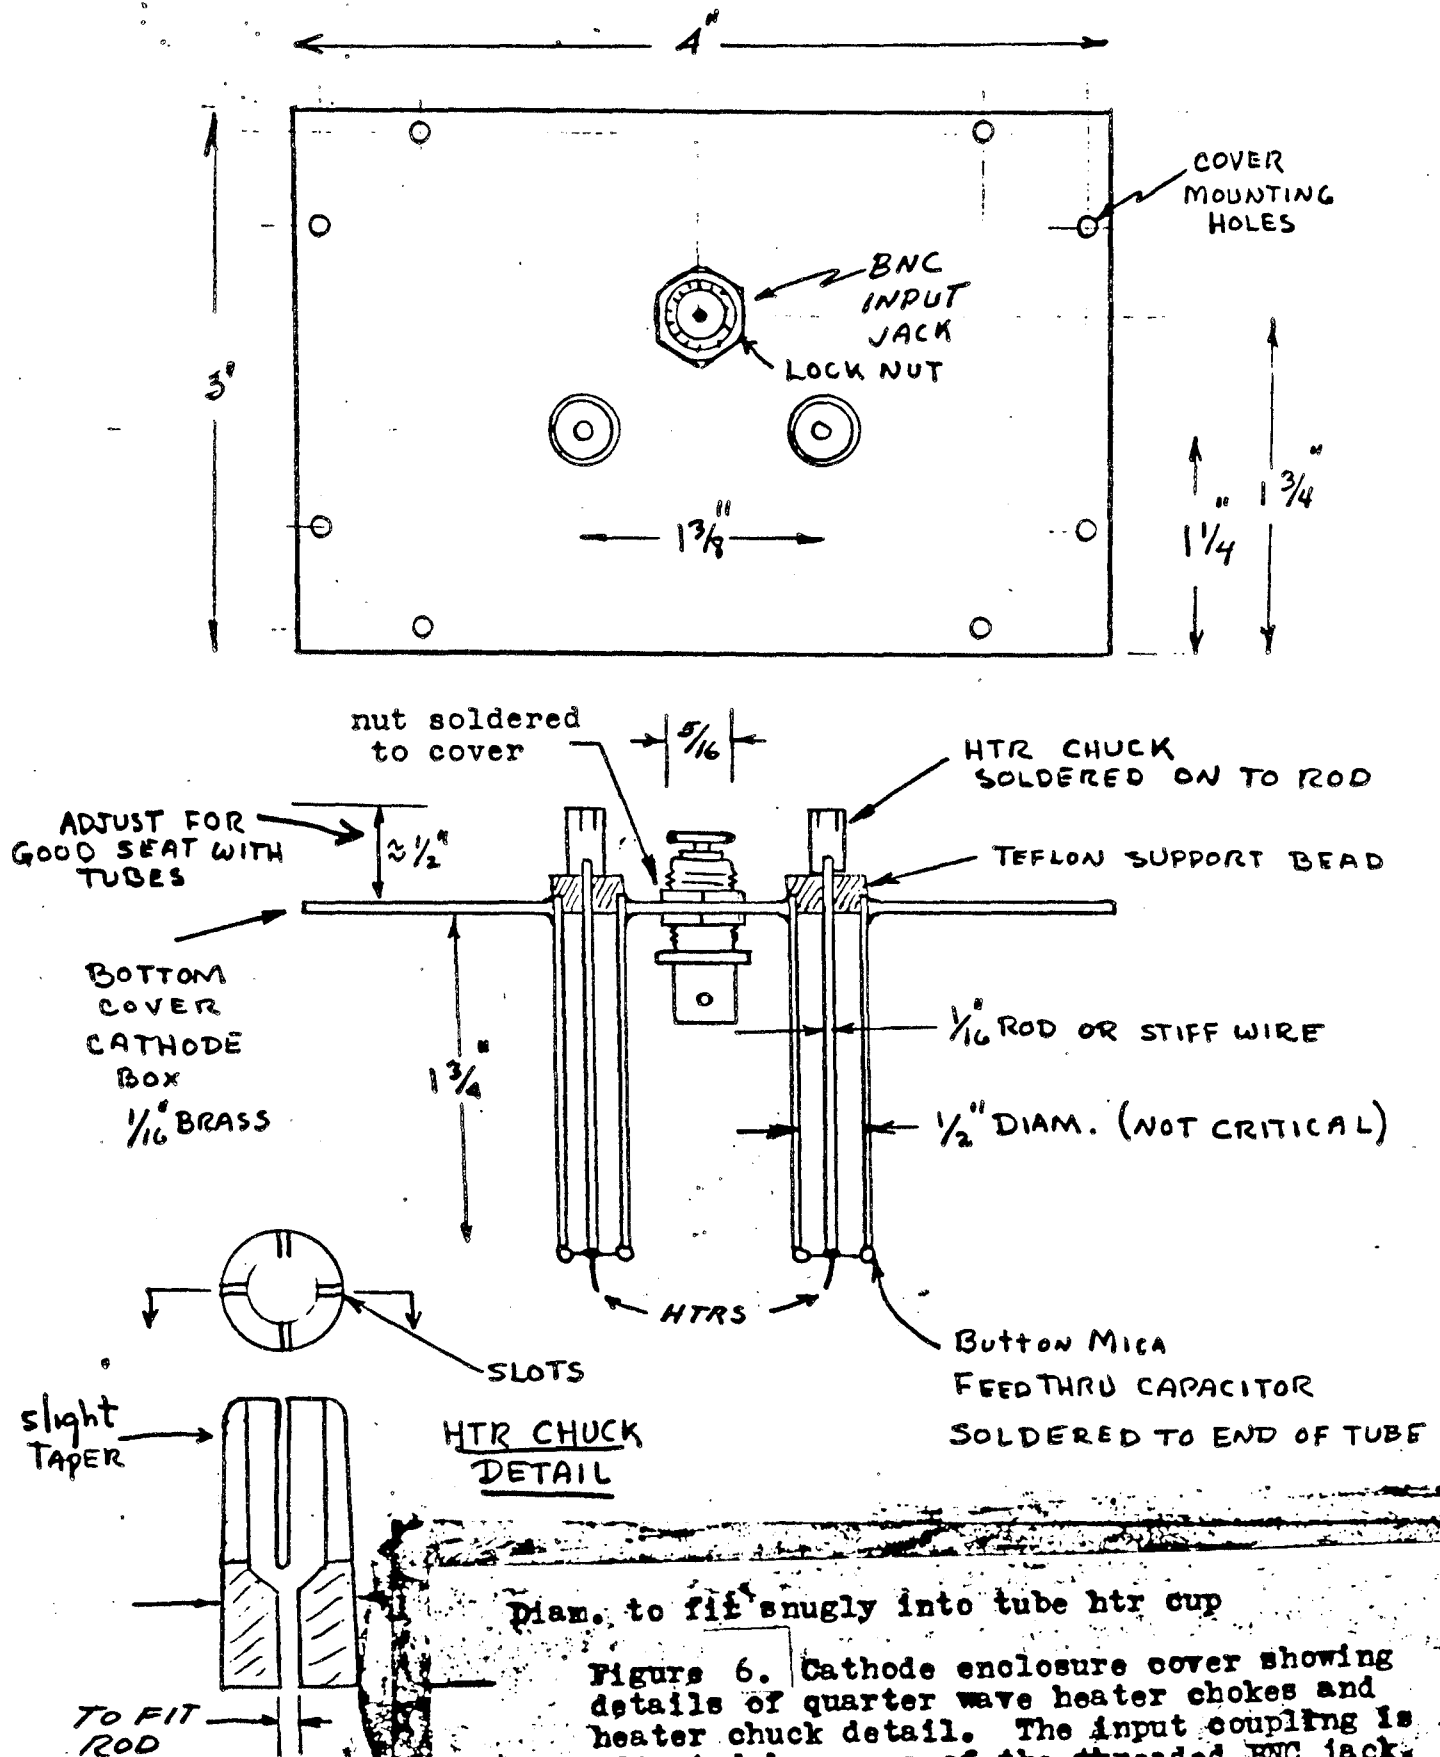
Cathode enclosure cover showing details of quarter wave heater chokes and heater chuck detail. The input coupling is adjusted by means of the threaded BNC jack. A lock nut is used on the outside and a similar nut may be soldered to the inside of the cover plate, or the plate may be tapped 3/8-32.
